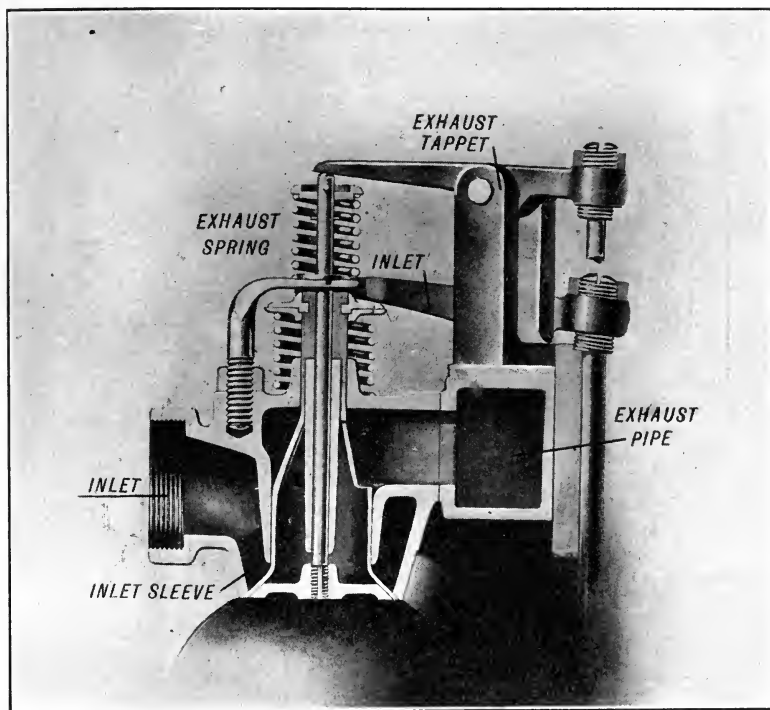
Section Through Concentric Valve Used on Some Franklin Models. The Exhaust Valve, which is a Regular Poppet Type, Seats in the Inlet Member, which is a Hollow Shell of Metal. Both Valves Open Directly into the Combustion Chamber.
